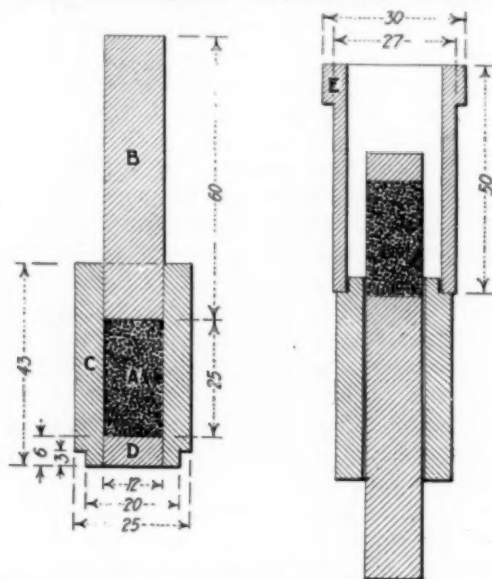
BRIQUETTING MOLD FOR REFRACTORY MATERIALS
